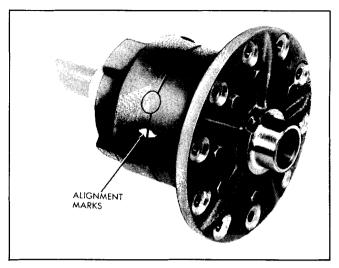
D-7 Paint on Alignment Marks Before Disassembly
